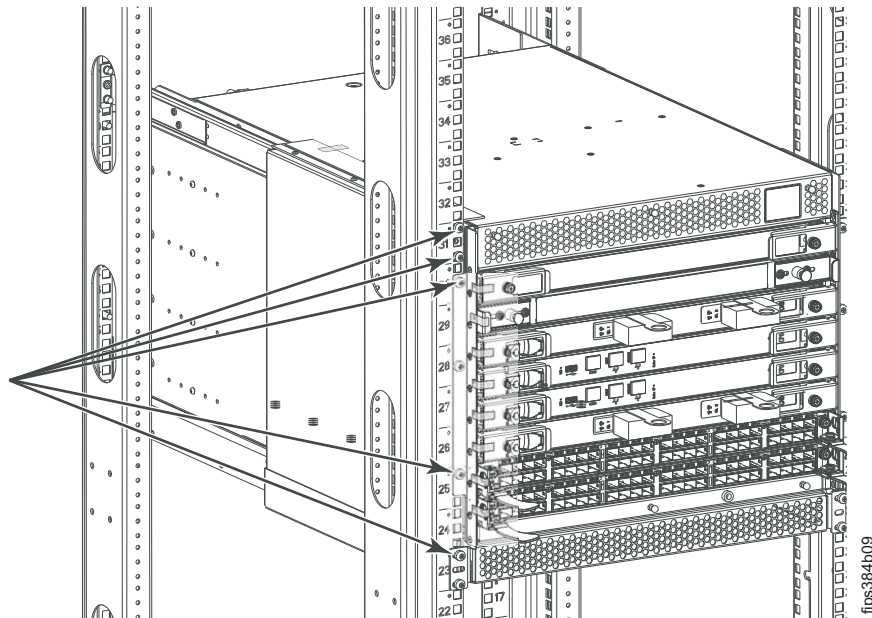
Five 2499-192 rackmount screws used for left side FIPS brackets (left port view)
